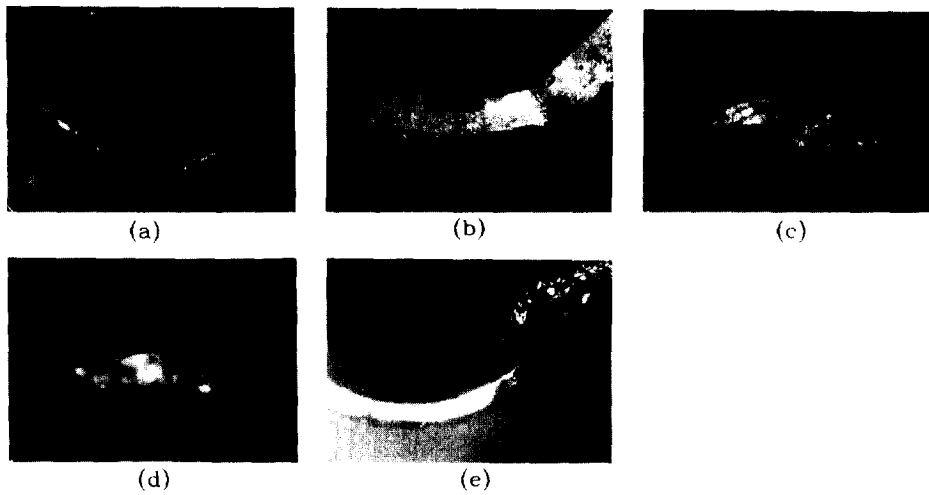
Typical fracture patterns of cutting tool occurred in machining hardened steel STd11.
